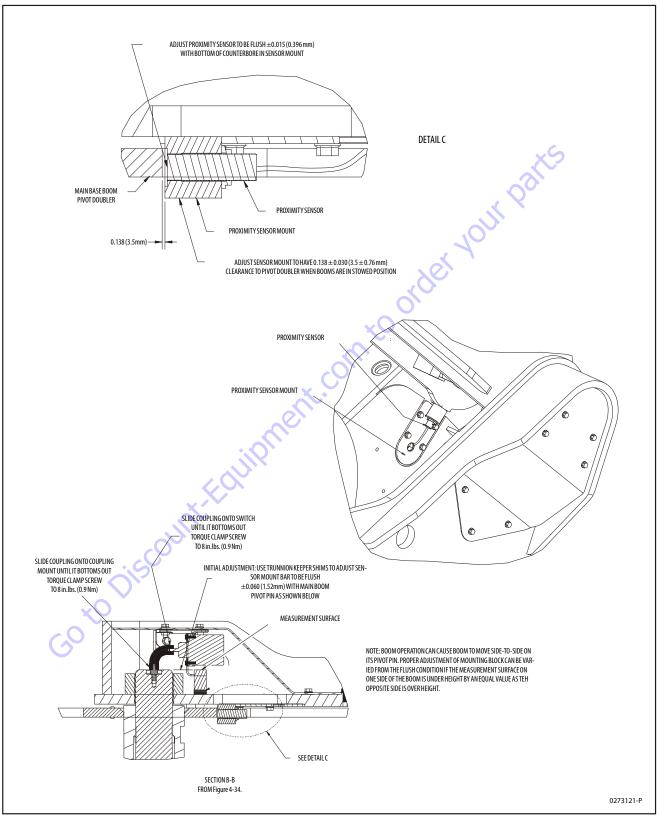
Boom Sensor Locations - Rotary Angle & Proximity Sensor - Sheet 2 of 2
